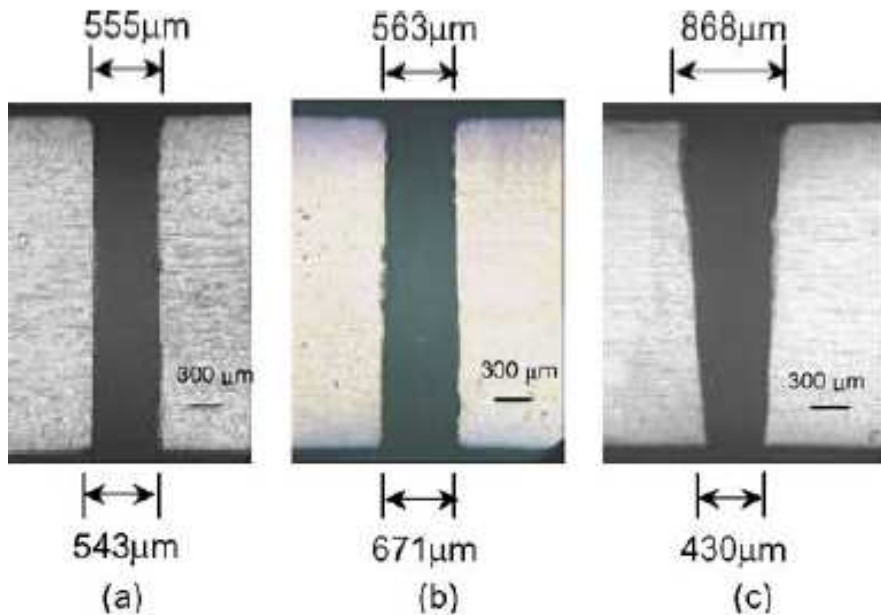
Taper types of the laser drilled hole; (a) zero taper (b) negative taper (c) positive taper
